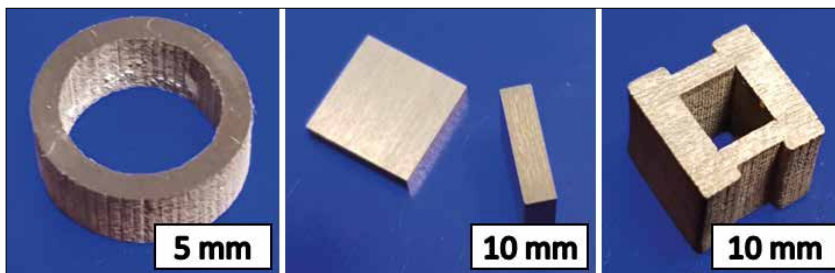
Single-material Si_3N_4 -components manufactured with CerAM MMJ
